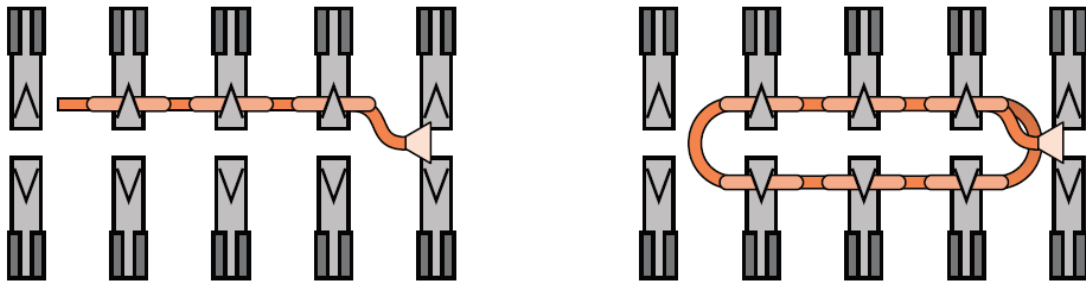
A top view of 5-needle back and 5-needle front beds. The left view shows a sheet of fabric, while the right view shows a tube of fabric.
